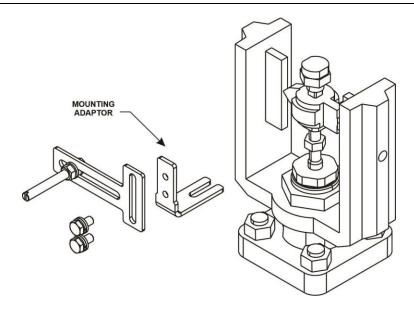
Feedback assembly mounted on mounting adaptor
